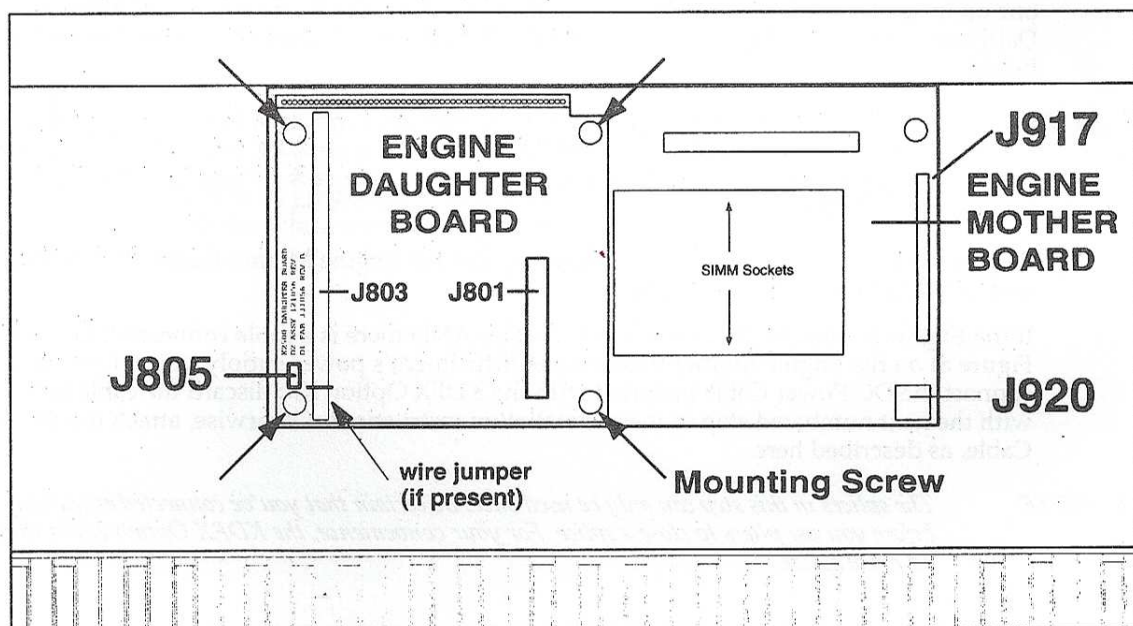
Top view of opened K2500/X, showing locations of Engine Daughter Board screws.
